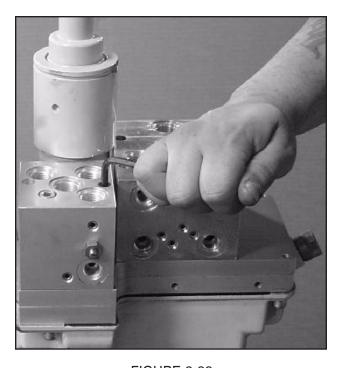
Use a 5mm allen wrench to remove the 2 bolts and a 6mm allen wrench to remove the remaining bolts which fasten the Universal Valve Block to the Base Plate.
